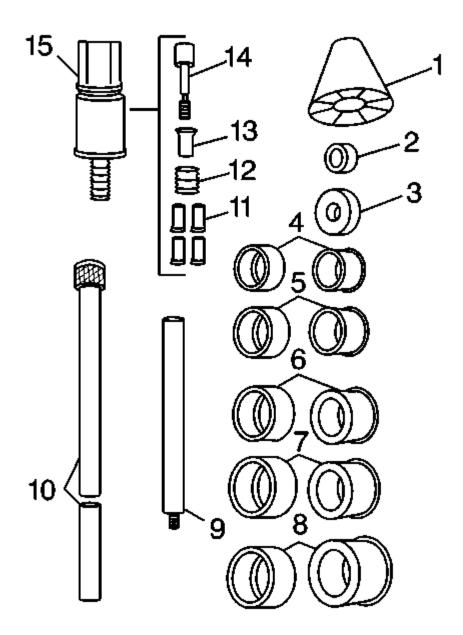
View Of J 33049 Camshaft Bearing Service Kit Components Courtesy of GENERAL MOTORS CORP.
